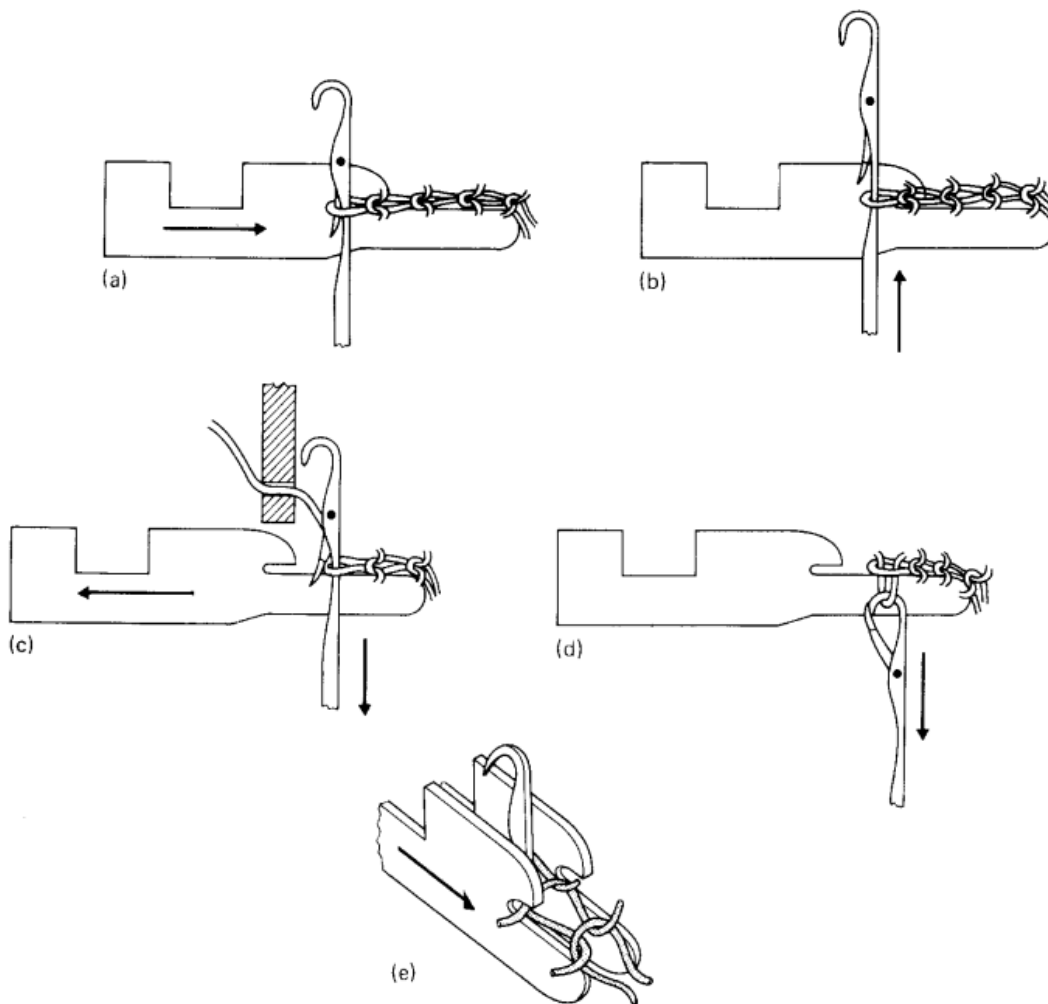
Knitting cycle of a single jersey latch needle machine.
